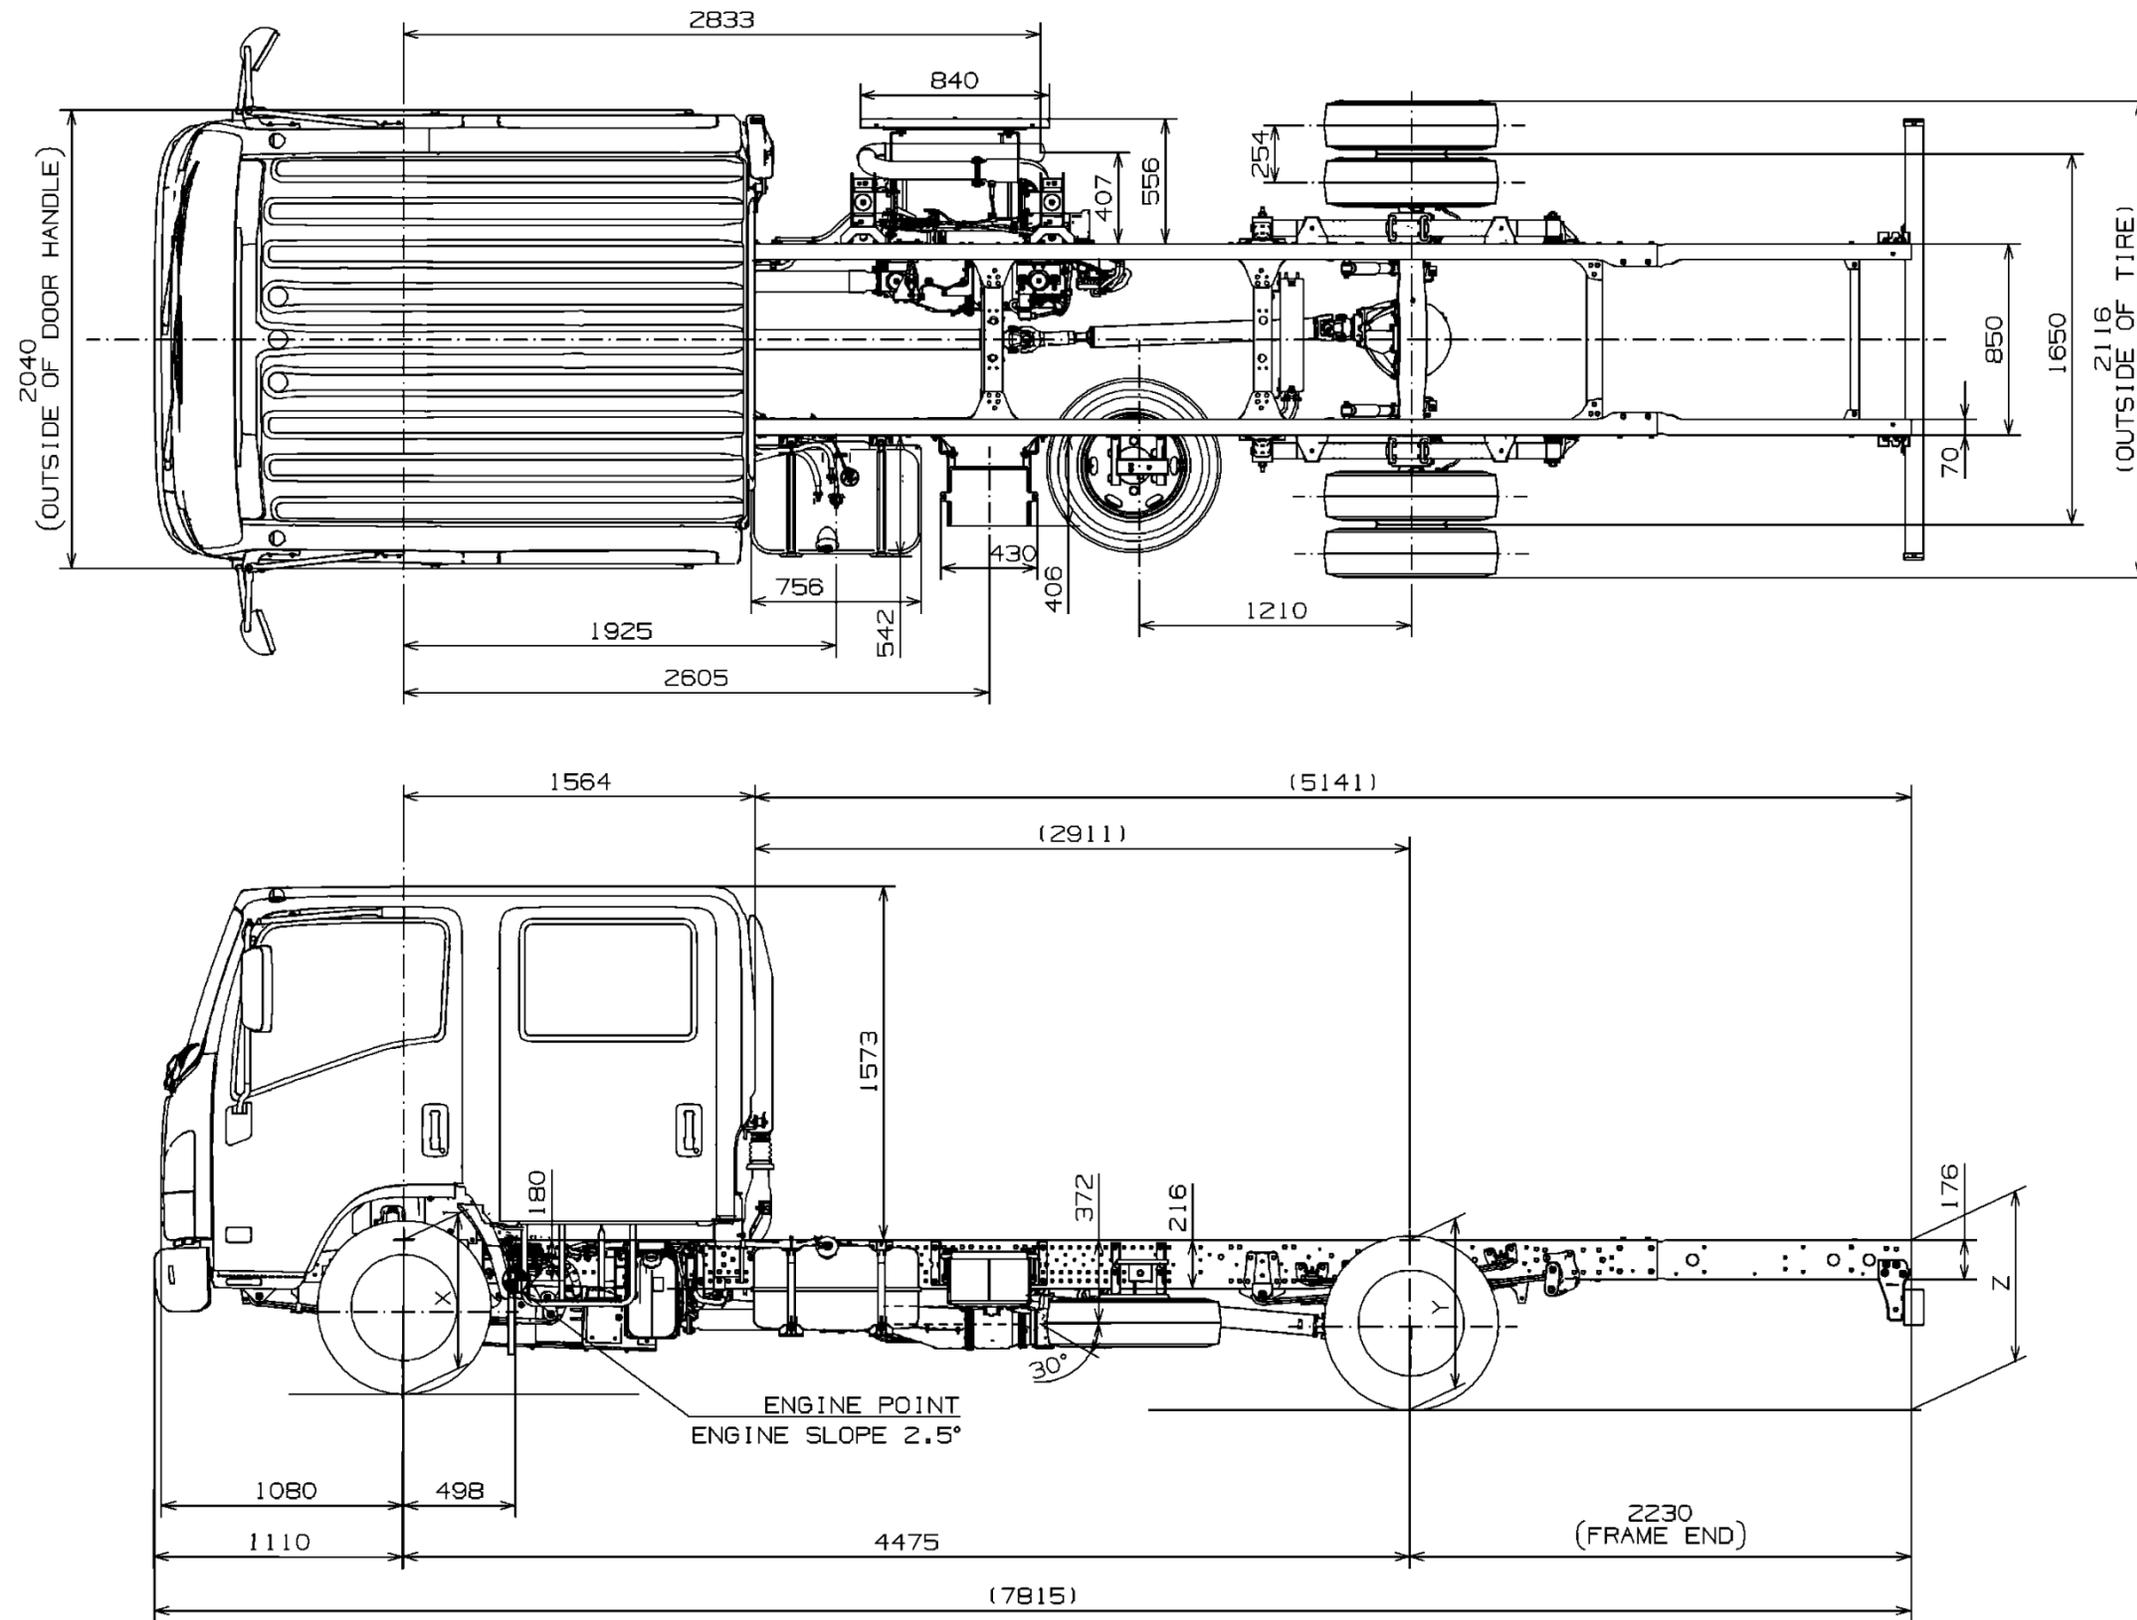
Cab Chassis Drawing NPR75L/U-ML5VWYE
